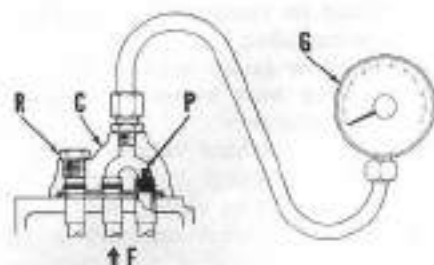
View showing installation of gage for checking hydraulic pump relief pressure on models 880, 990 and 4600. Axle cover plate (C) must be removed and a special plug (P) installed to block passage to control valve. Flow (F) is then closed except to gage (G). Return port (R) is for external hydraulic use.
